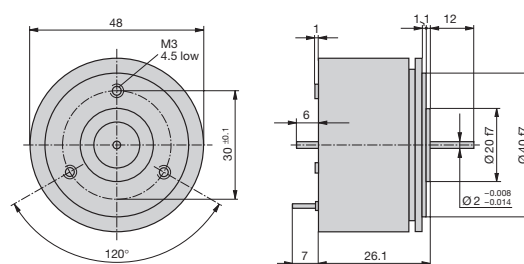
KINAX 3W2 with special drive shaft at front and at rear.
